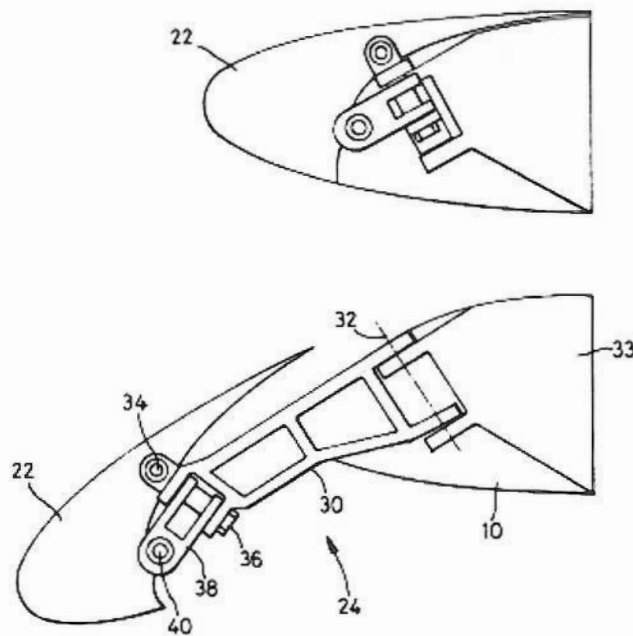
Planform of Craig Broadbent's Swing Arm Slat Mechanism [3]
